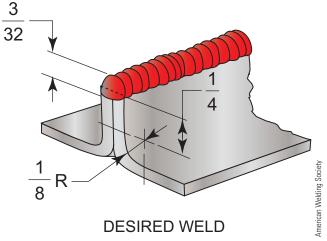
Applying dimensions to flange welds.
